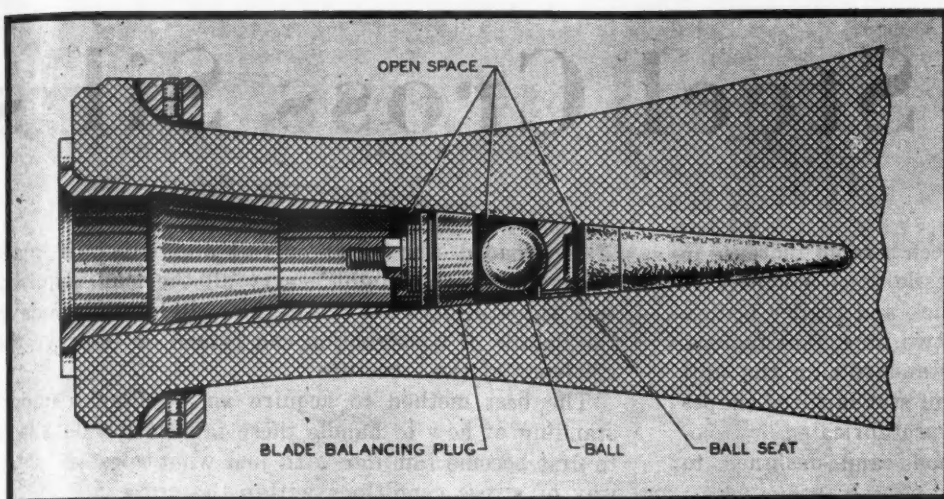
Sectional view showing installation of ball vibration damper in shank of propeller blade.
